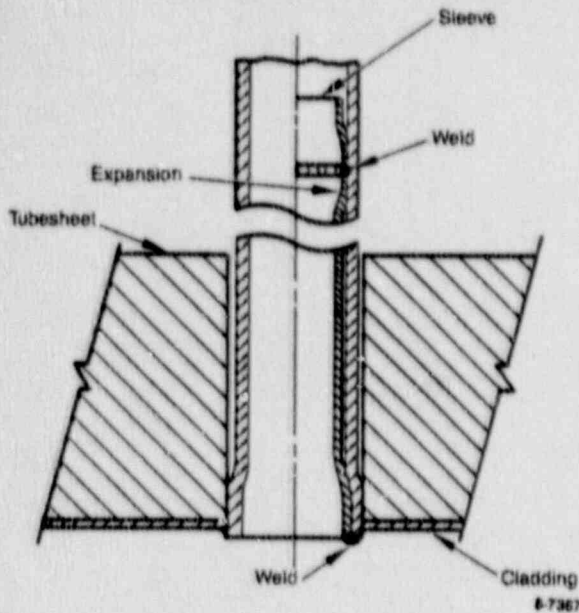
Welded sleeve design (Combustion Engineering).
